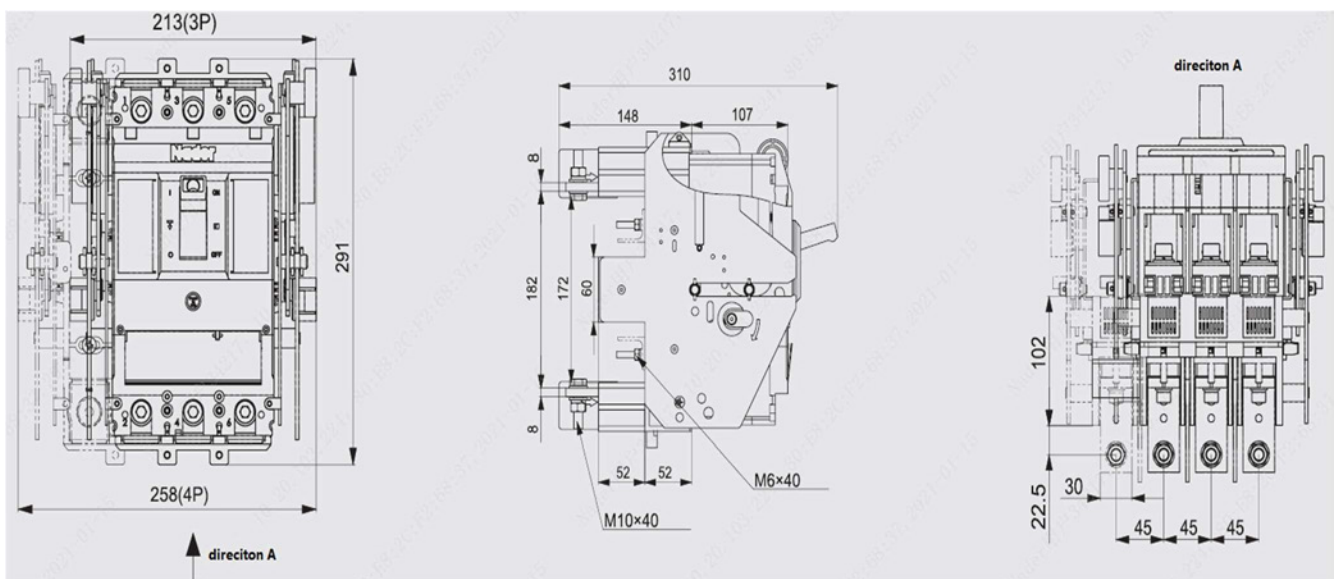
outline and installation dimensions of 3-pole and 4-pole back panel connection products with drawer
